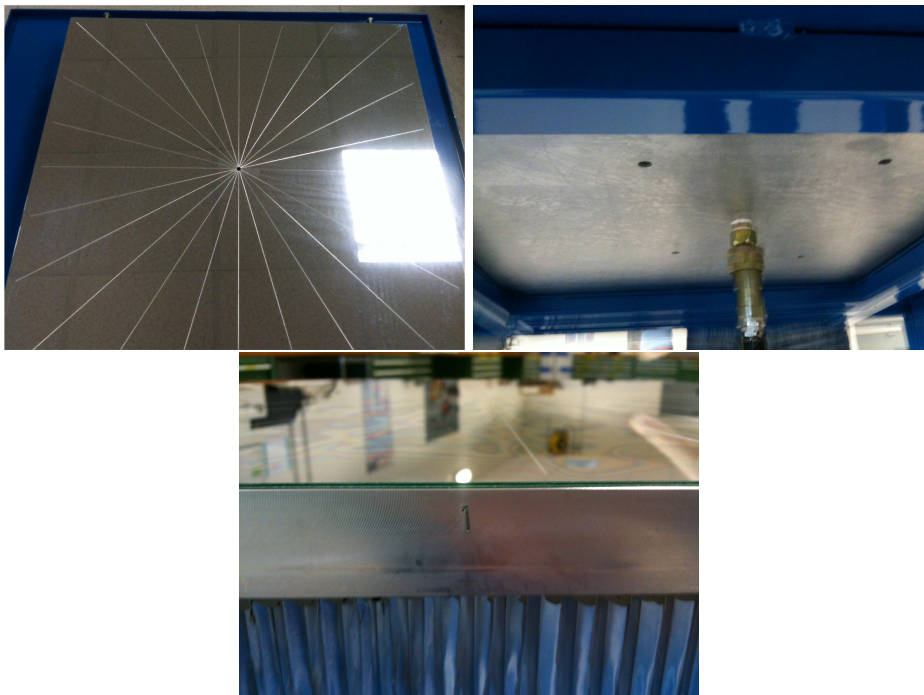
Close-up of the mold surface. *Left:* Small air channels have been incised to assure a good surface contact during the shaping. *Right:* A vacuum pump is attached underneath the mold by a central hole. *Bottom:* The reflective layer, here a thin glass sheet, is deformed on the mold.
